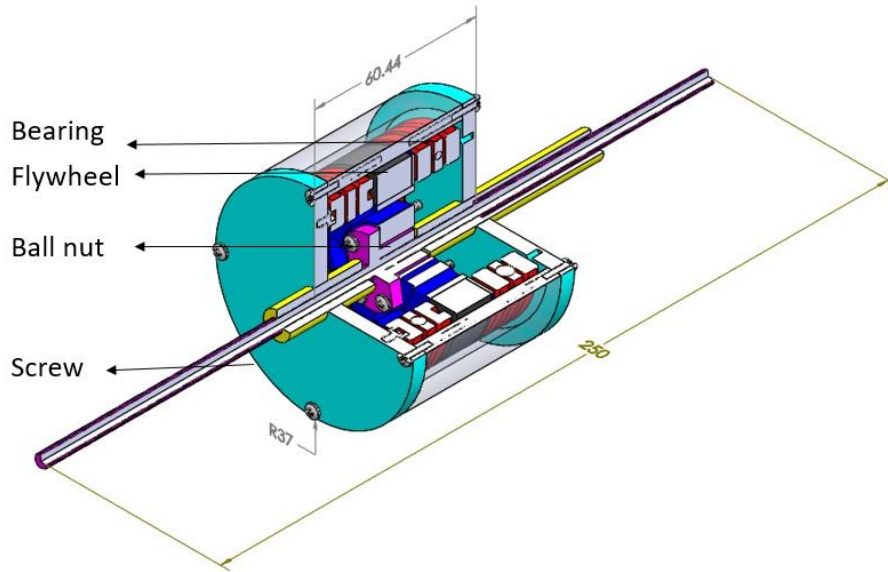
Ball and screw inverter CAD model. Units: mm
